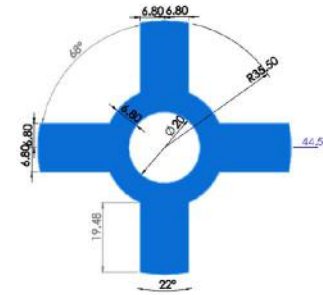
CAD drawing of 2-d cross-sectional view of rotor core.
